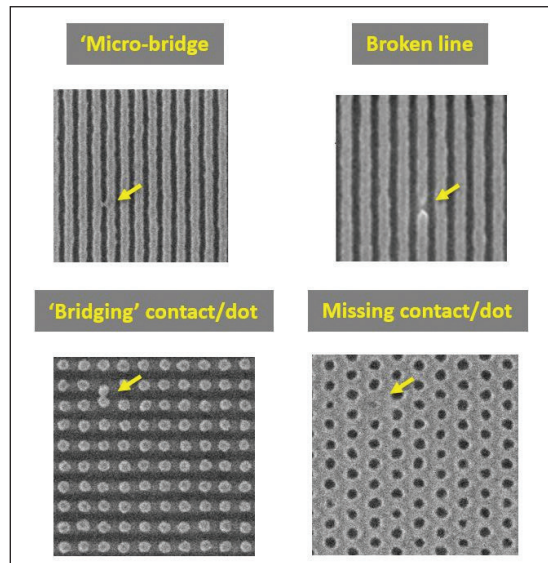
Stochastic printing failures observed after printing (top) lines/spaces, and (bottom) contact holes.
